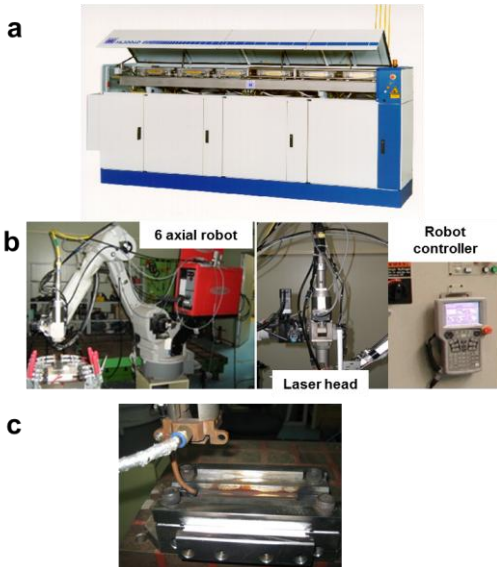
Laser welding machine with (a) laser oscillator, (b) 6 axial robot system and (c) nozzle for shielding gas.
